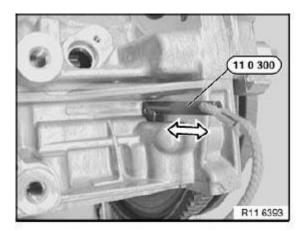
Sliding Crankshaft In Special Tool (11 0 300)
